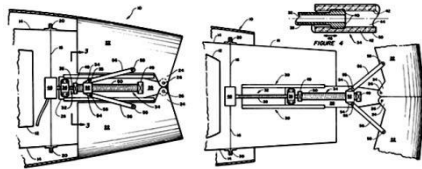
Diagrammatic side elevated section of aircraft screw jack mechanisms thrust reverser
